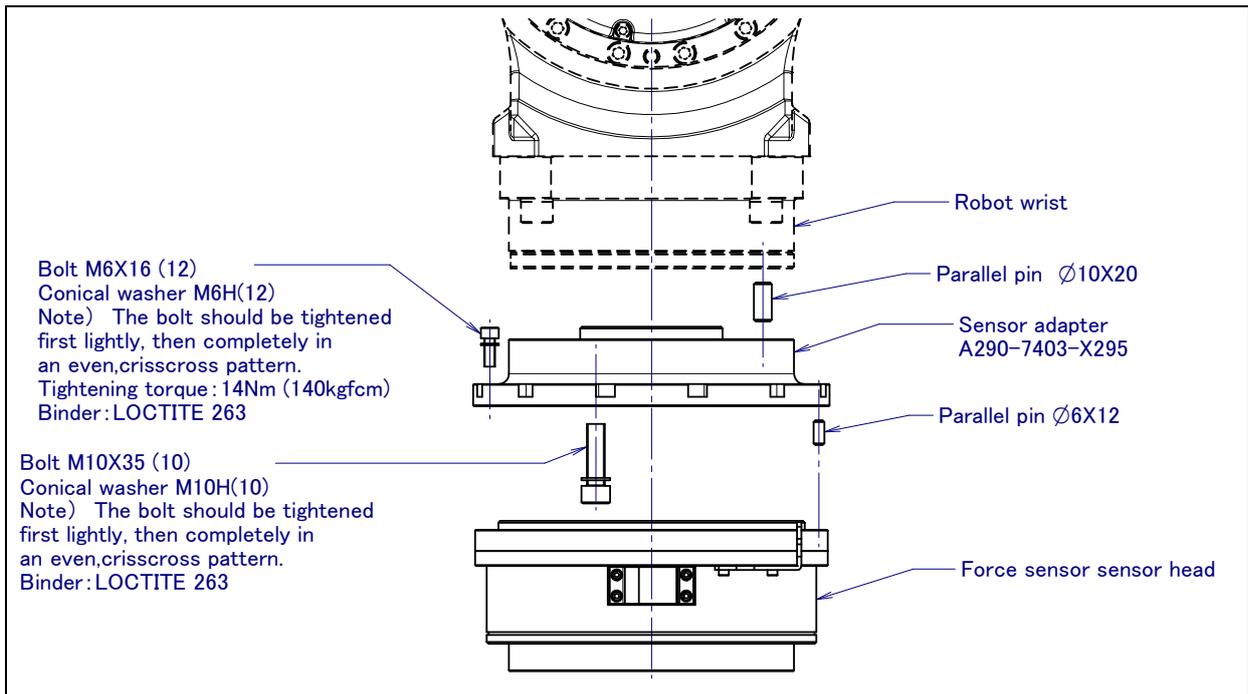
(f) Replacing the force sensor, sensor head and adapter (R-2000iB+FS-250iA with standard adapter)
